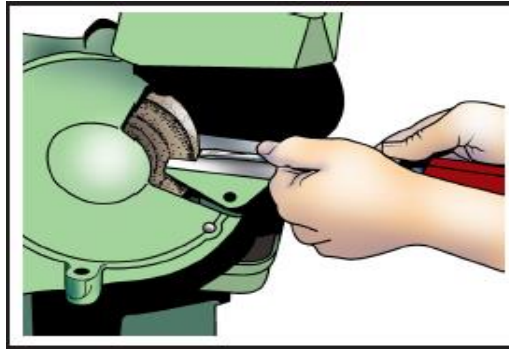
Reconditioning a Screwdriver on a Bench Grinder, With Tool Supported by the Tool Rest
